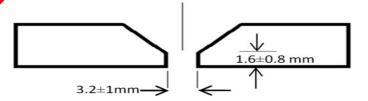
Joint design for welding A106 pipes to A105 connections/connectors
